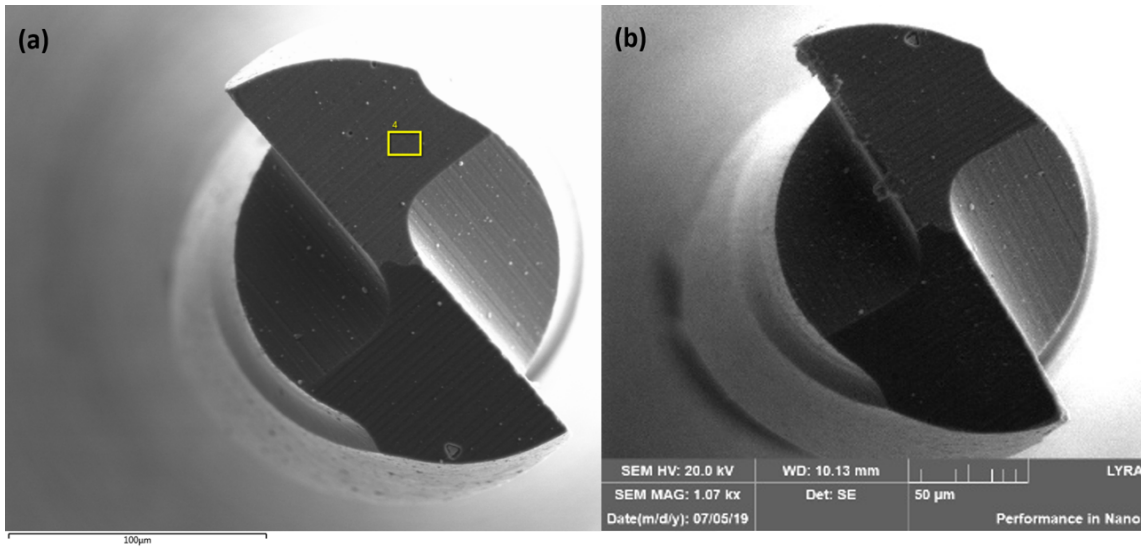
SEM image of CES 1 (a) before (b) after machining.
